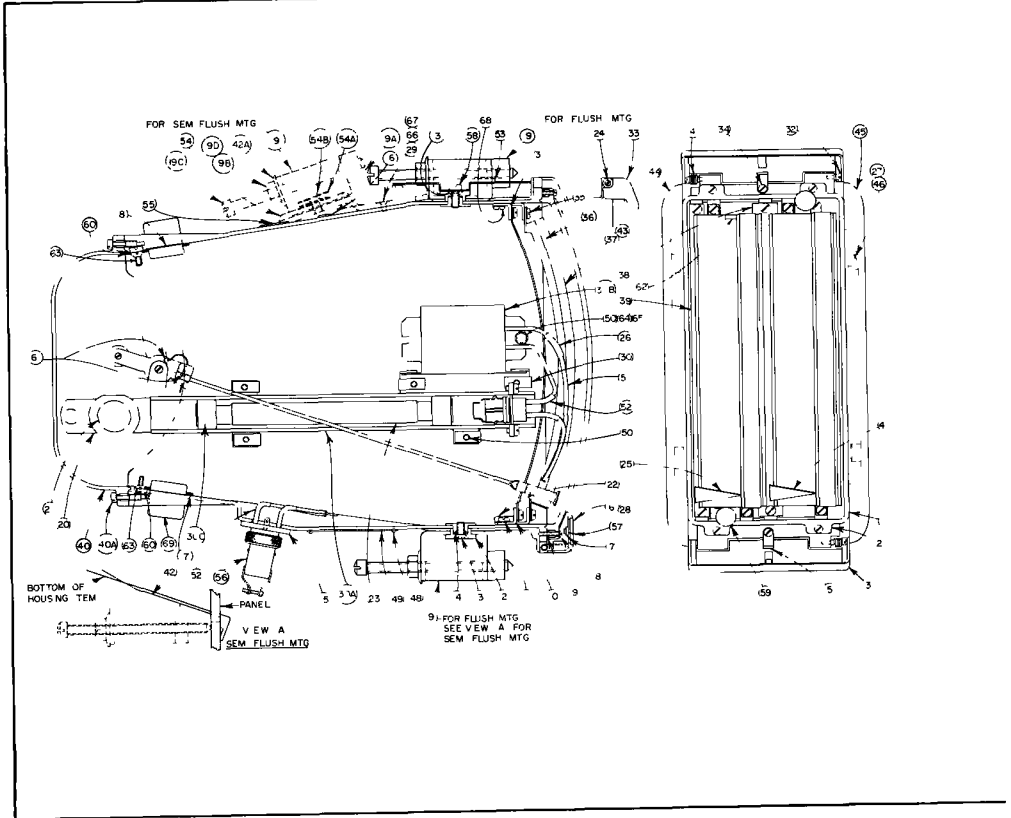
' Parts Drawing M42 25, Case and Pointer Assembly
